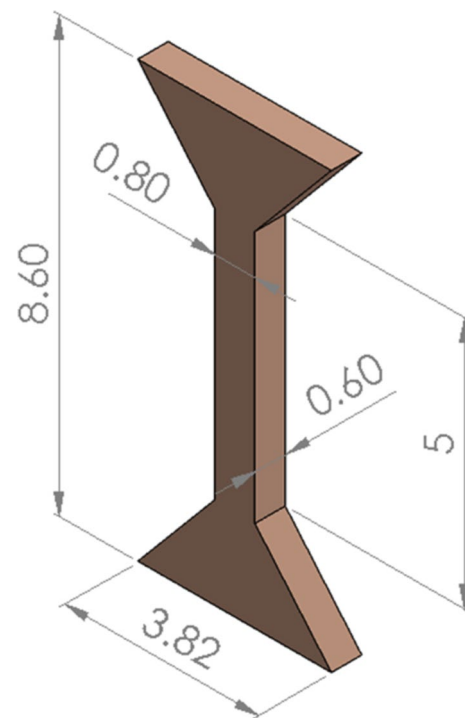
Shape and dimensions of the miniature specimens for the static tensile test
